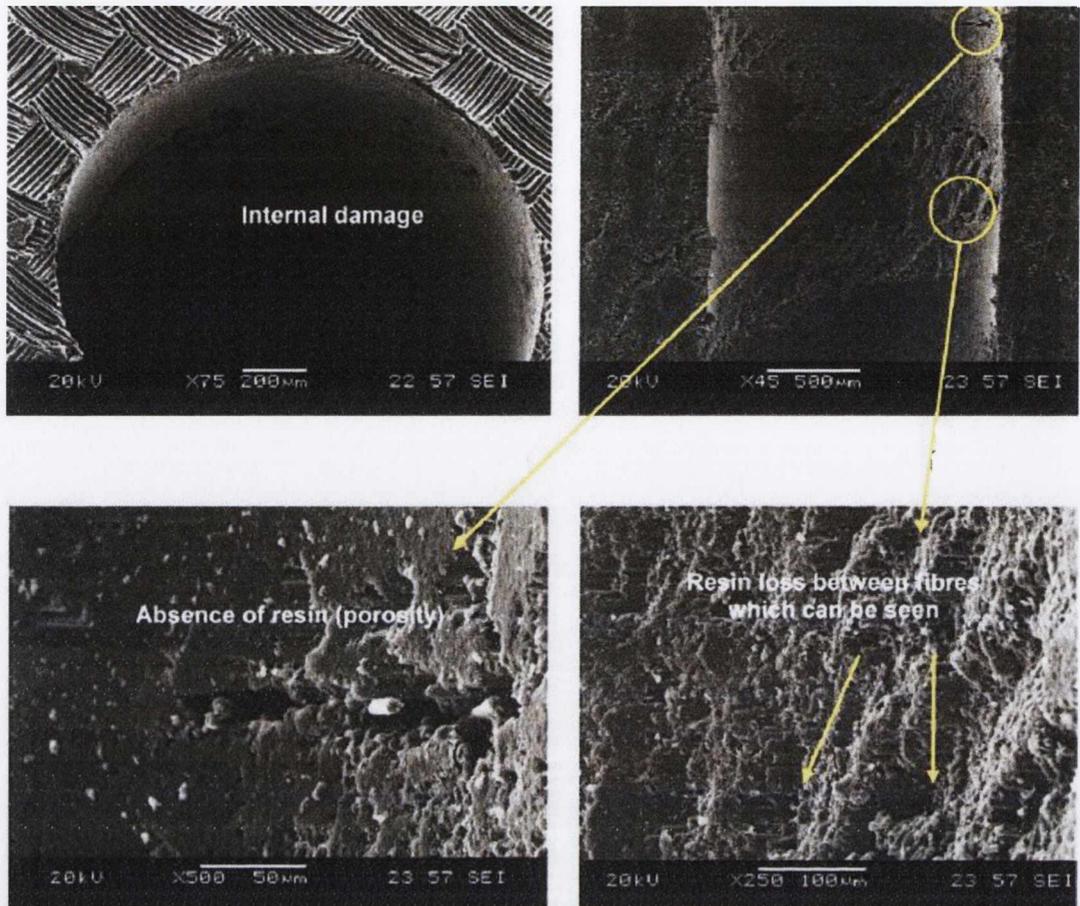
Internal hole damage determined by Shyha due to porosity and layer separation [114].
